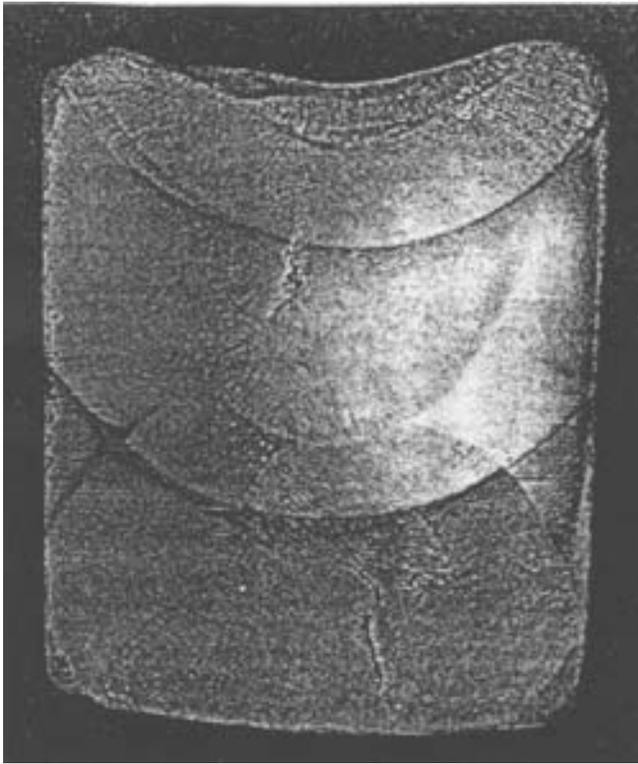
Cracking in a multipass submerged-arc weld in 18Ni (250) showing cracking emanating from "eye-brow" regions. Etchant: modified Fry's. X3
